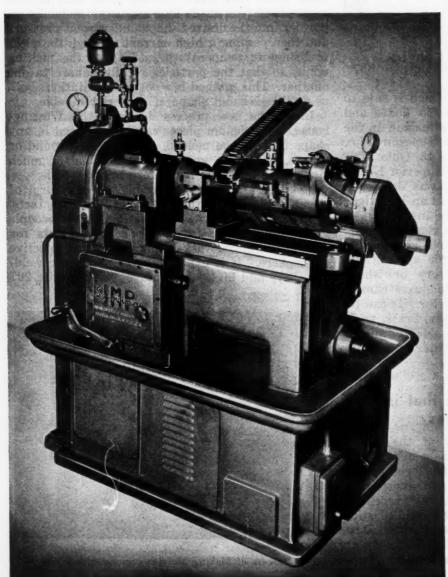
Imp Lo-Swing Automatic Lathe Brought out by the Seneca Falls Machine Co.
